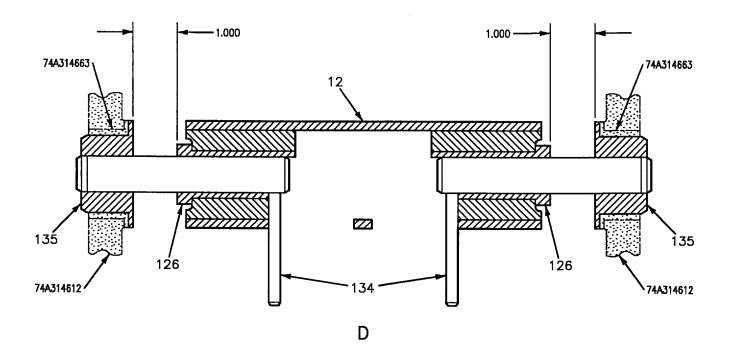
Tool Installation and Alignment Check (Sheet 3)
